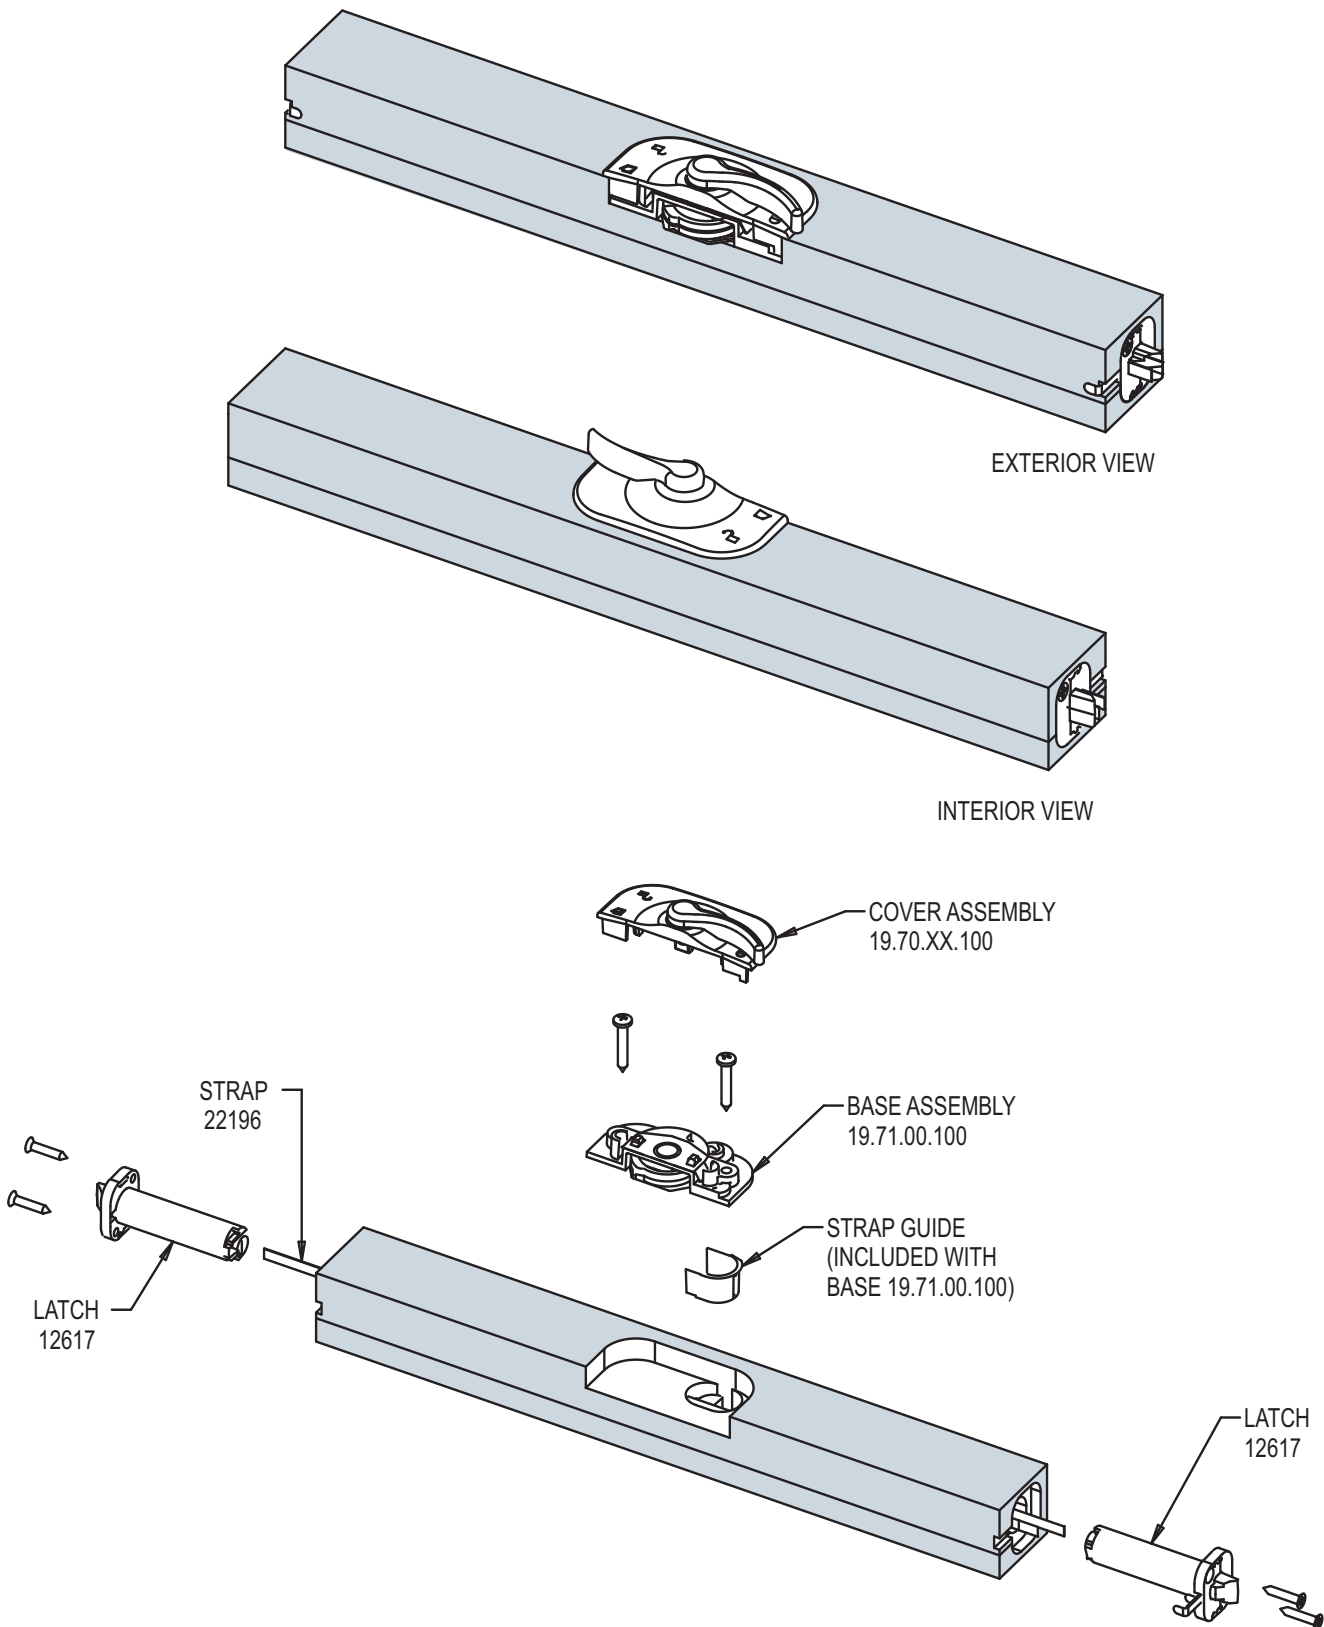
FUSION KEEPER ASSEMBLY FOR WOOD APPLICATION
